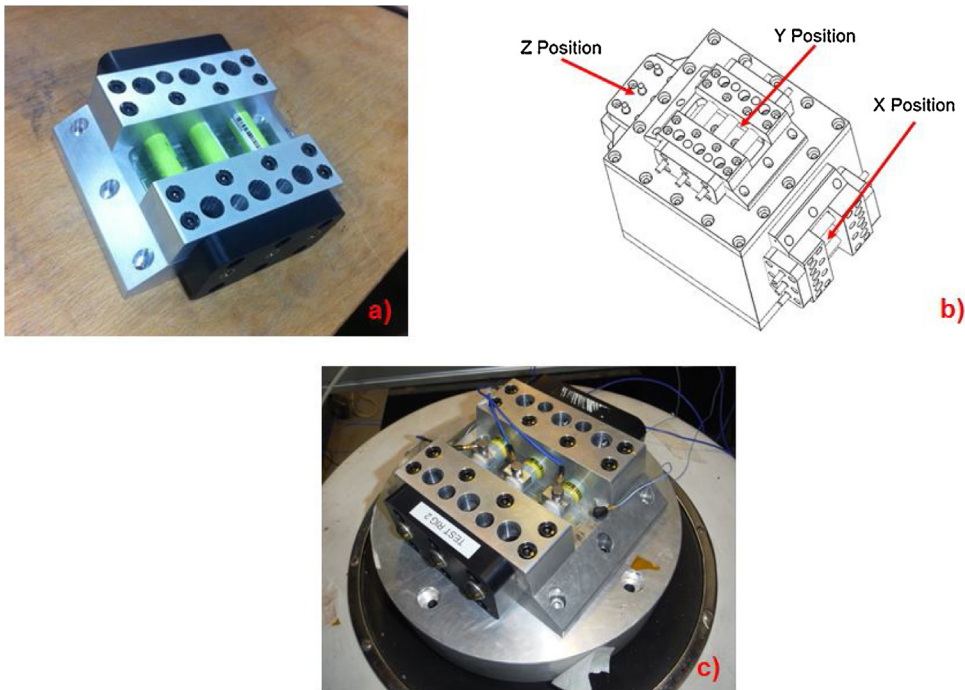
a) Single Three 18650 Cell Holding Fixture, b) 18650 Block Fixture, c) Single Three 18650 Cell Holding Fixture on Resonance Search Plate.
